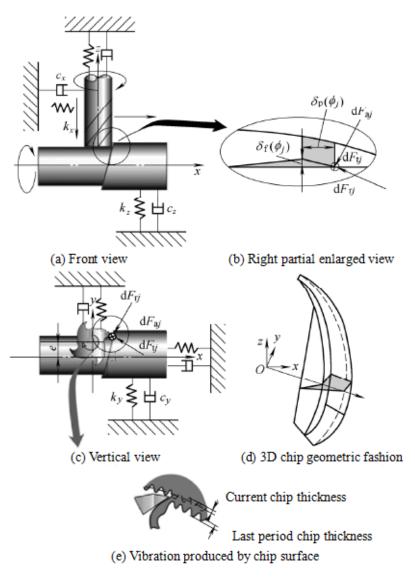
The 3d Shape of Chip when End Mill and Workpiece Vibrating Relatively in Three Direction
